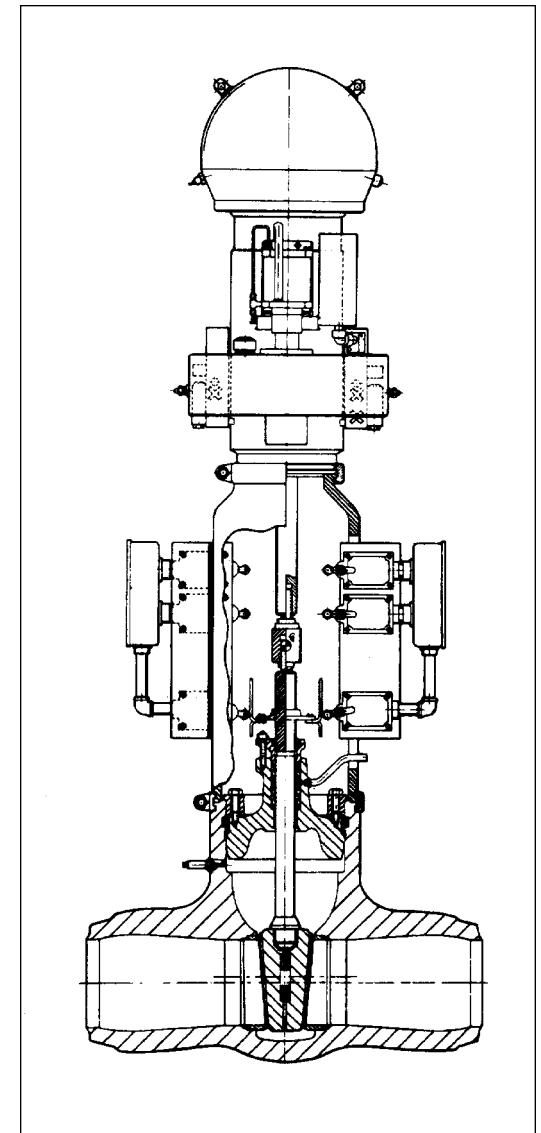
Cross-sectional drawing of the Rockwell Equiwedge gate valve with Type A actuator.
